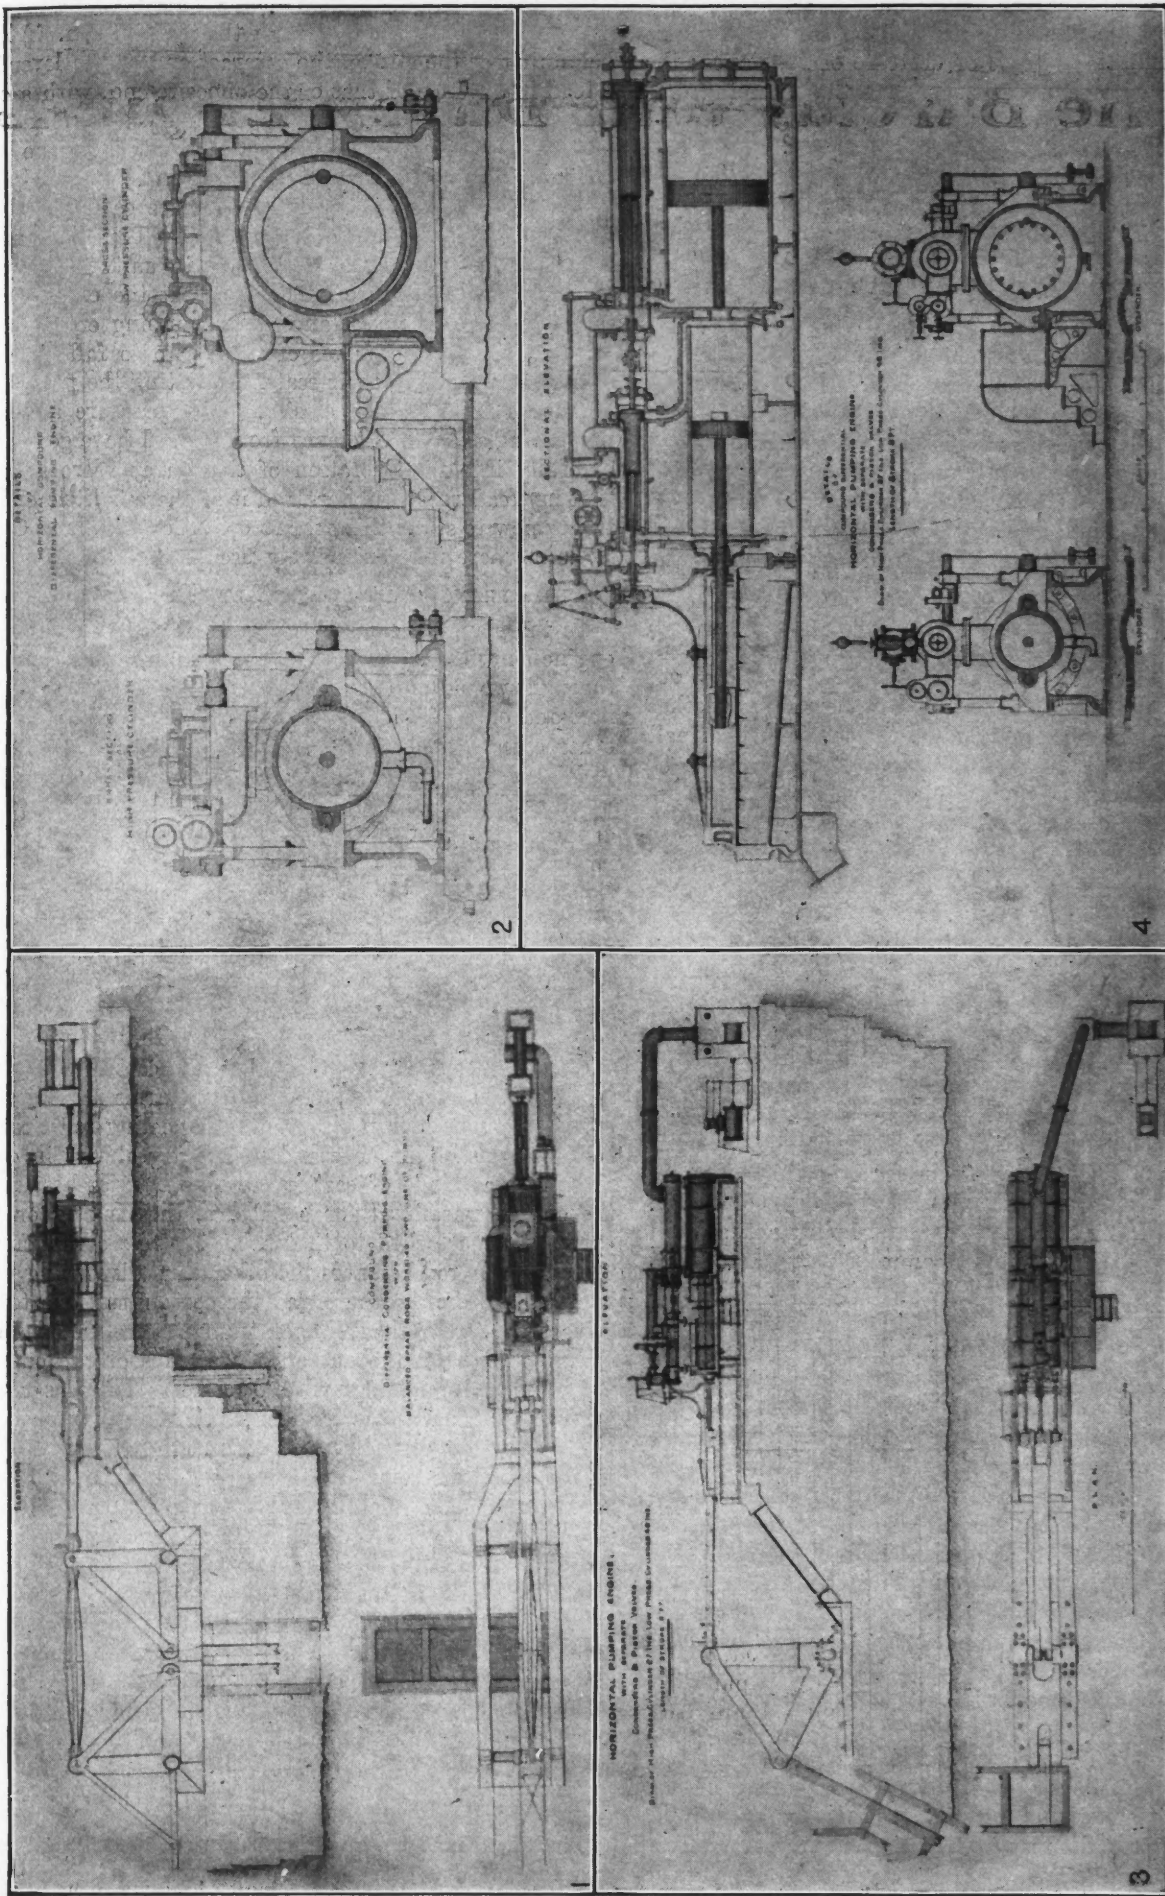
PLAN AND ELEVATION OF DAVEY ENGINE
